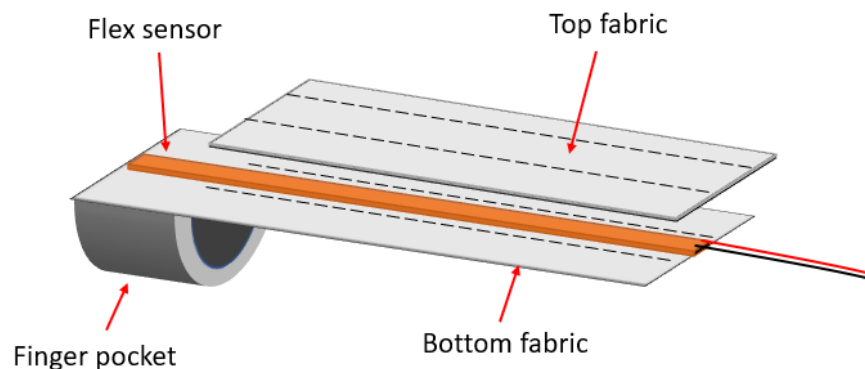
Exploded view of the finger sleeve for the PneuNet actuator.
